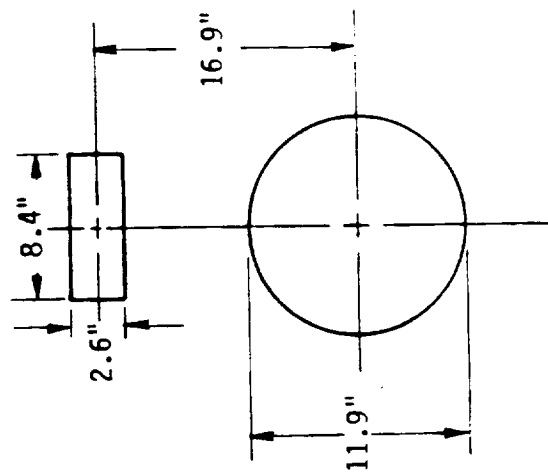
Cross-Sectional Model of the Cable Tunnel on Strut
